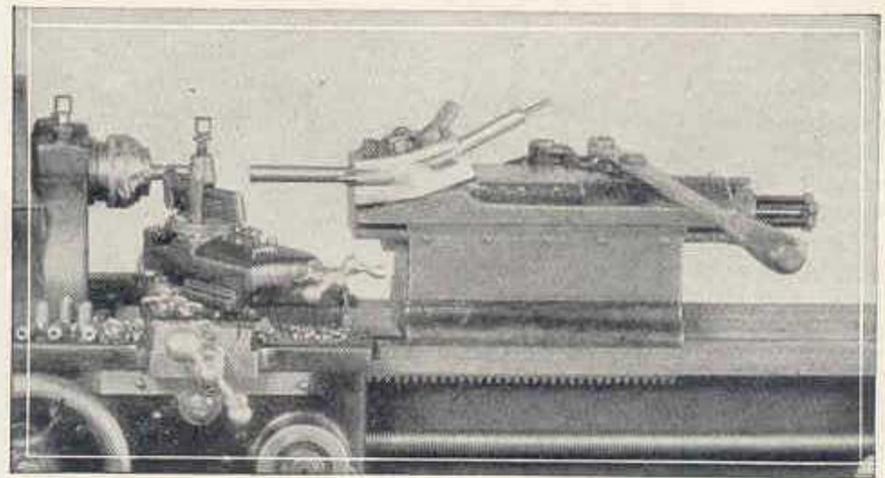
A 9-Inch Junior Lathe with Draw-In Collet Chuck and Semi-Automatic Bed Turret.
